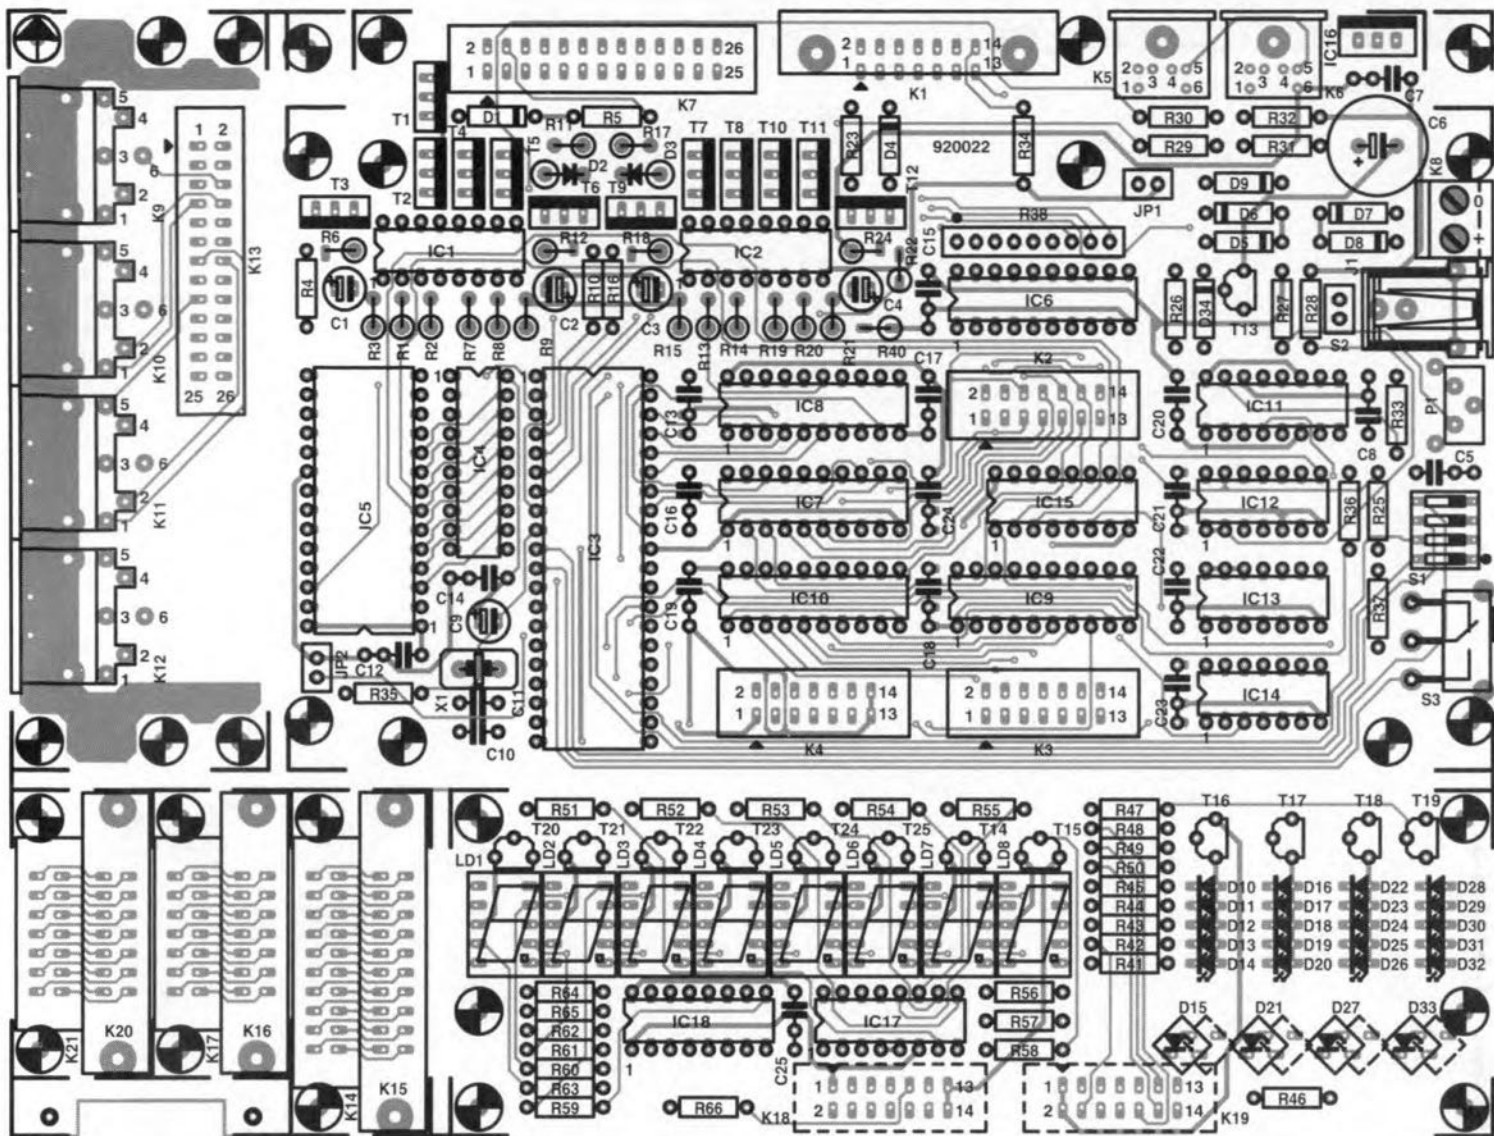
Component overlay (size: 100%) of the dissolve unit PCB.
